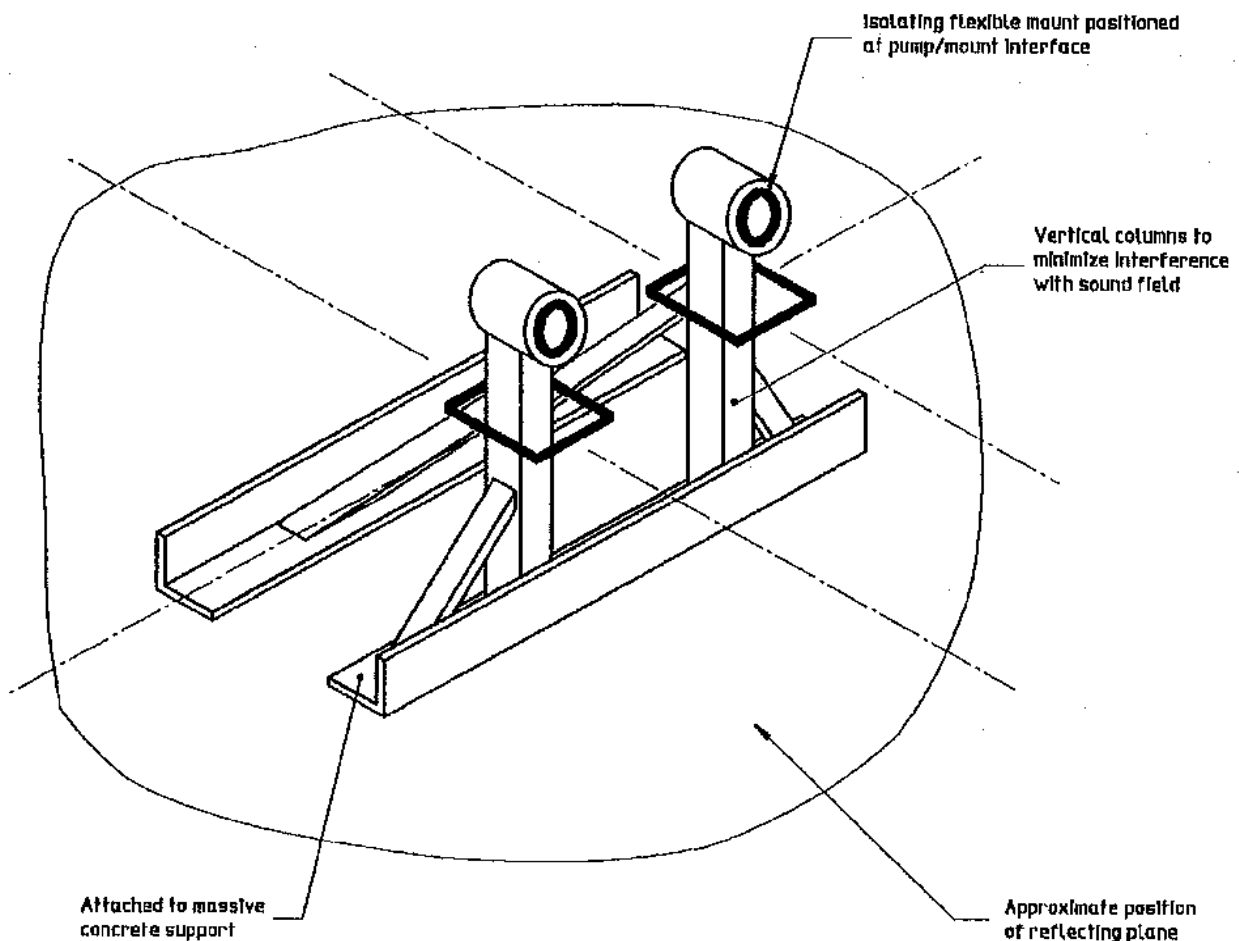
"Minimized" pump mount (two-bolt flange mounting configuration)
